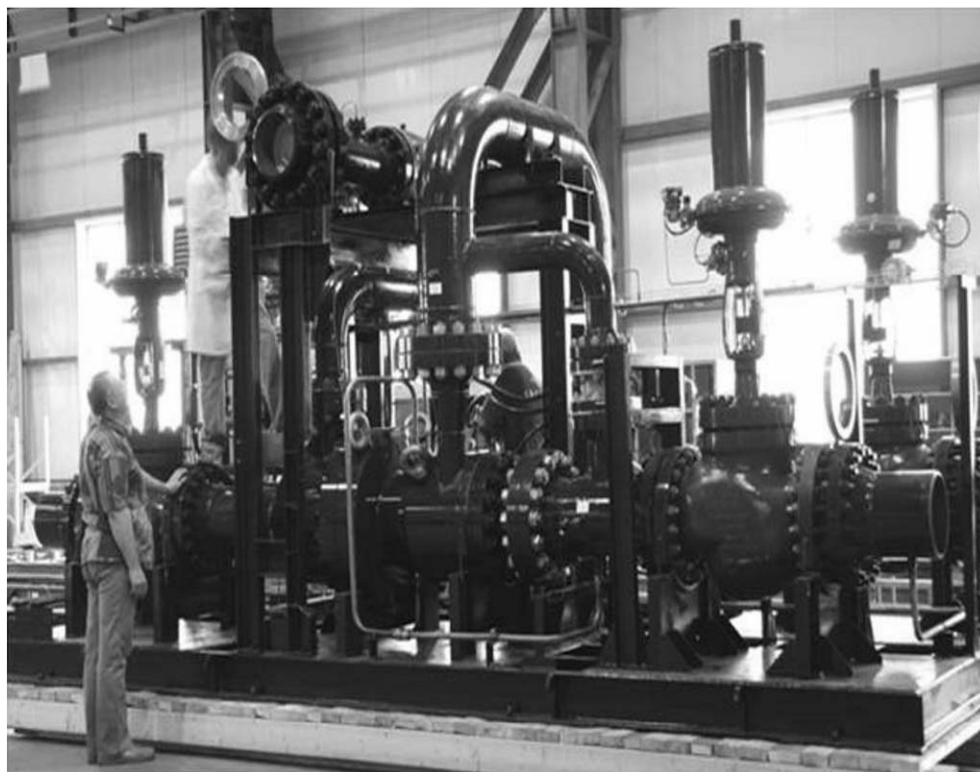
Turboexpander unit with adjustable guide apparatus and magnetic bearings.
